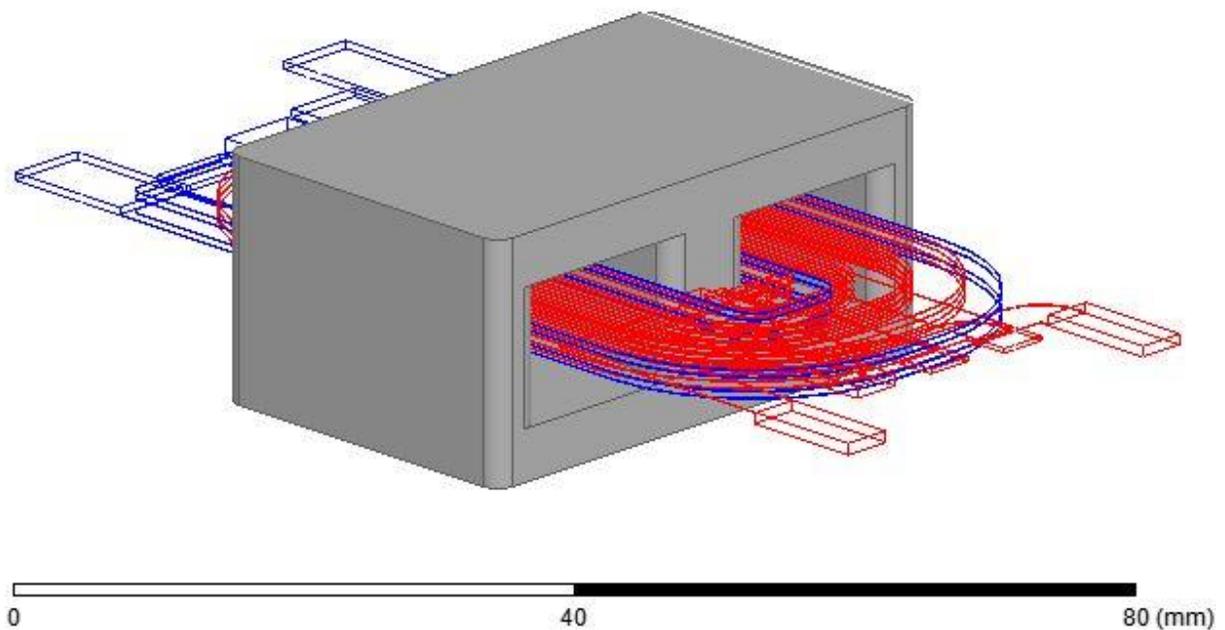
3D model of planar transformer core with PCB integrated series windings
